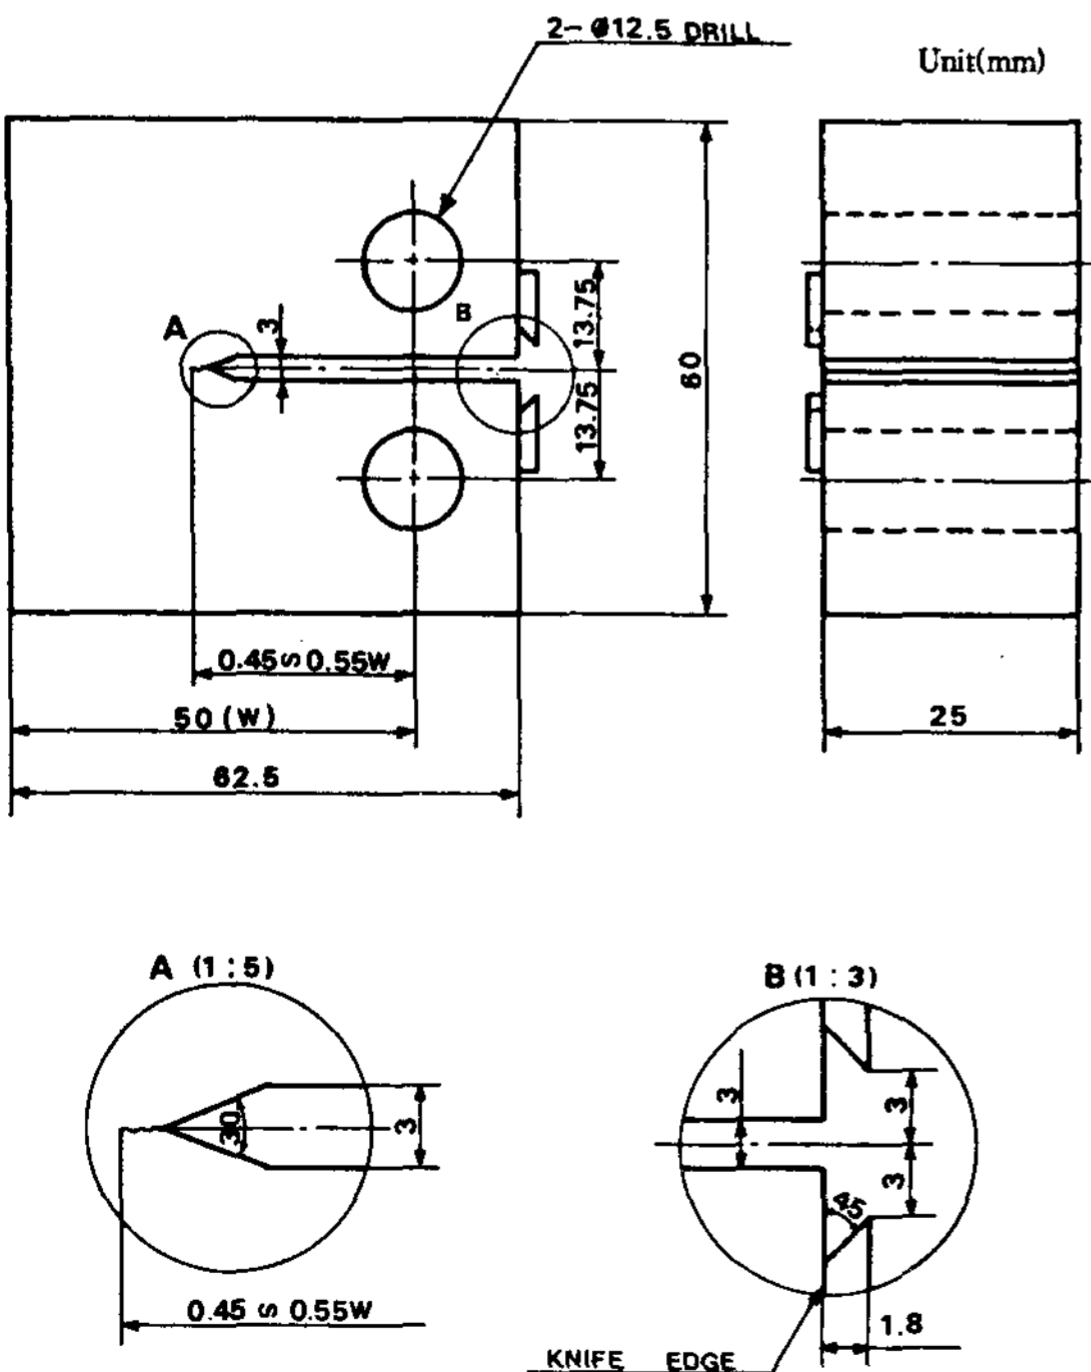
Dimension of CT specimen for fracture toughness test(unit : mm).
